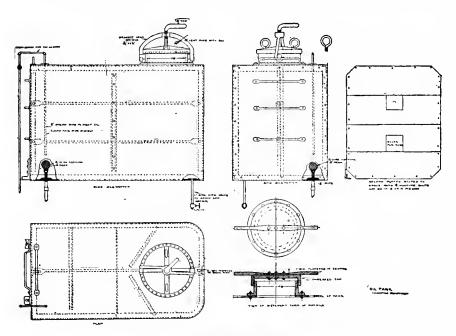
Oil tank placed in former coal space of locomotive tender.
